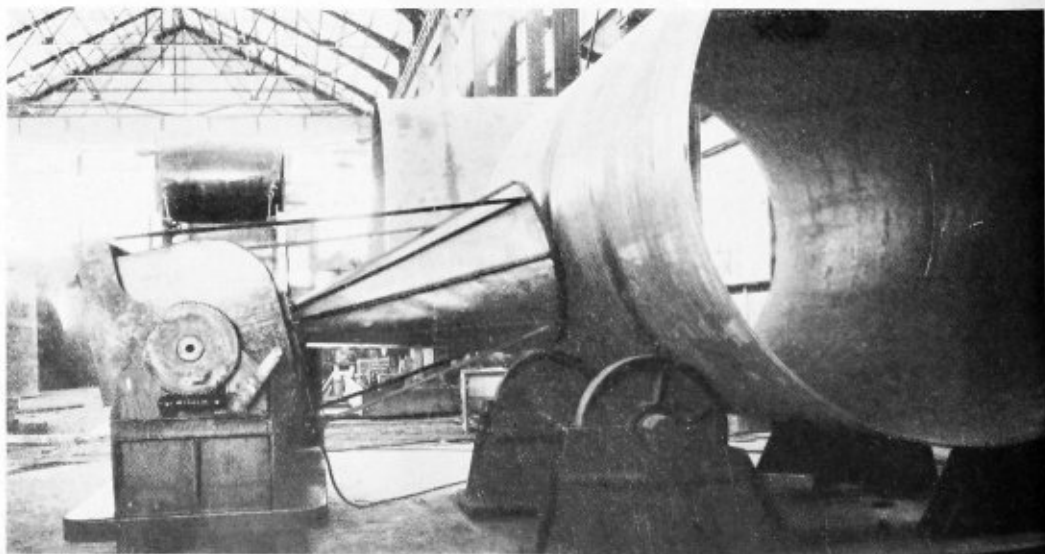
X-ray machine in position for inspection of welded girth seam in 8½-foot diameter pipe section
